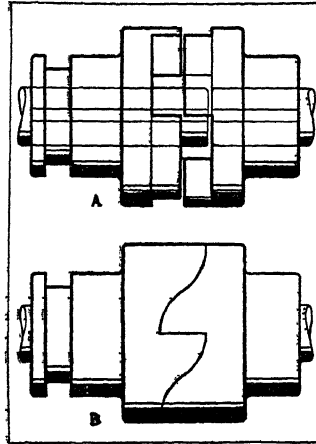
(A) CLAW OR JAW CLUTCH. (B) SPIRAL CLAW, OR RATCHET CLUTCH
